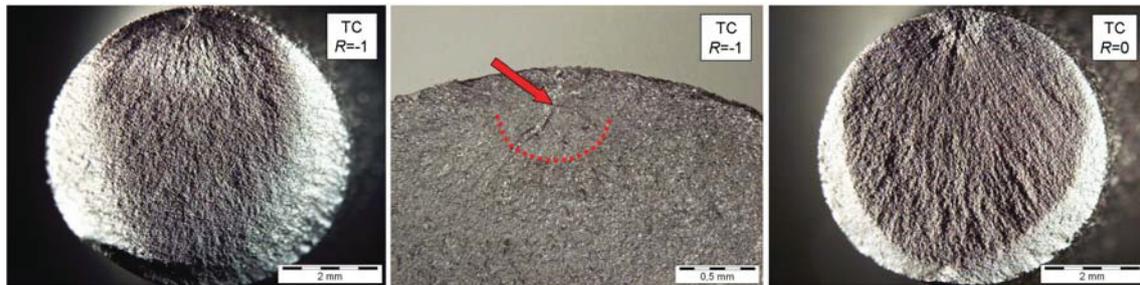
Fracture surfaces of shot peened specimens, intensity 0.16 A(mm); loaded under tension/compression
